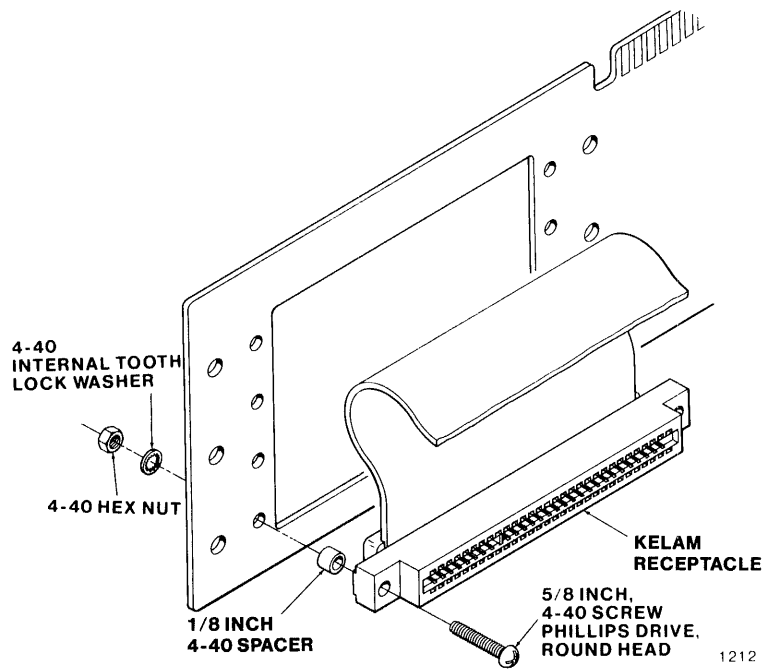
Typical iLBX™ Bus Interface Cable Assembly
